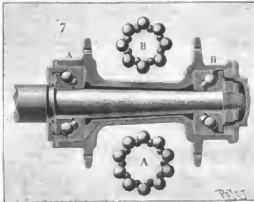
HUB OF A LIGHT CARRIAGE WITH BALL BEARINGS.
